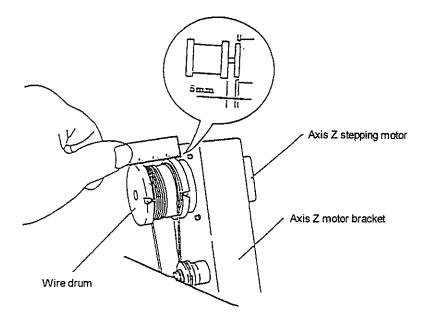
Gap between the Wire Drum and the Axis Z Wire Bracket
